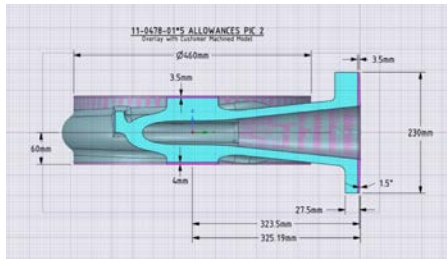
Cast Iron Machining and Draft Angle Allowances
